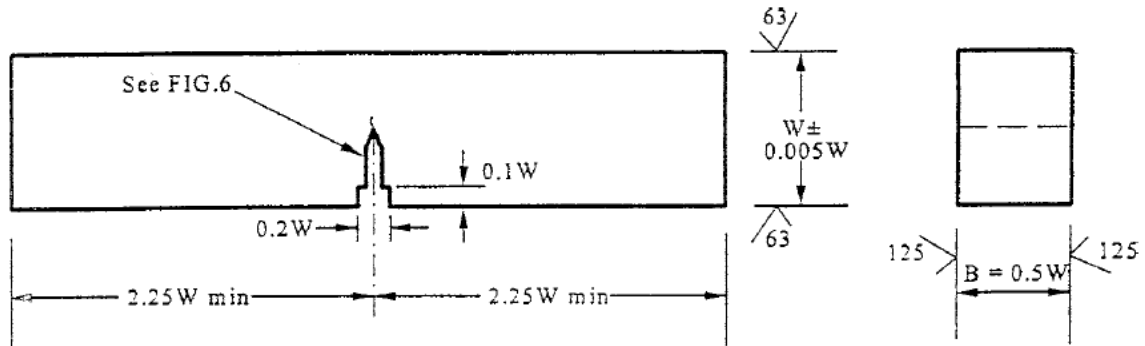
Fracture toughness test specimen SENB for J_{IC} and FCGR testing
